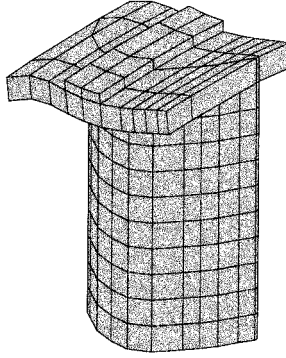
HPT shrouded assembly 1; cyclic symmetric sector (one blade and the associated shroud portion).
